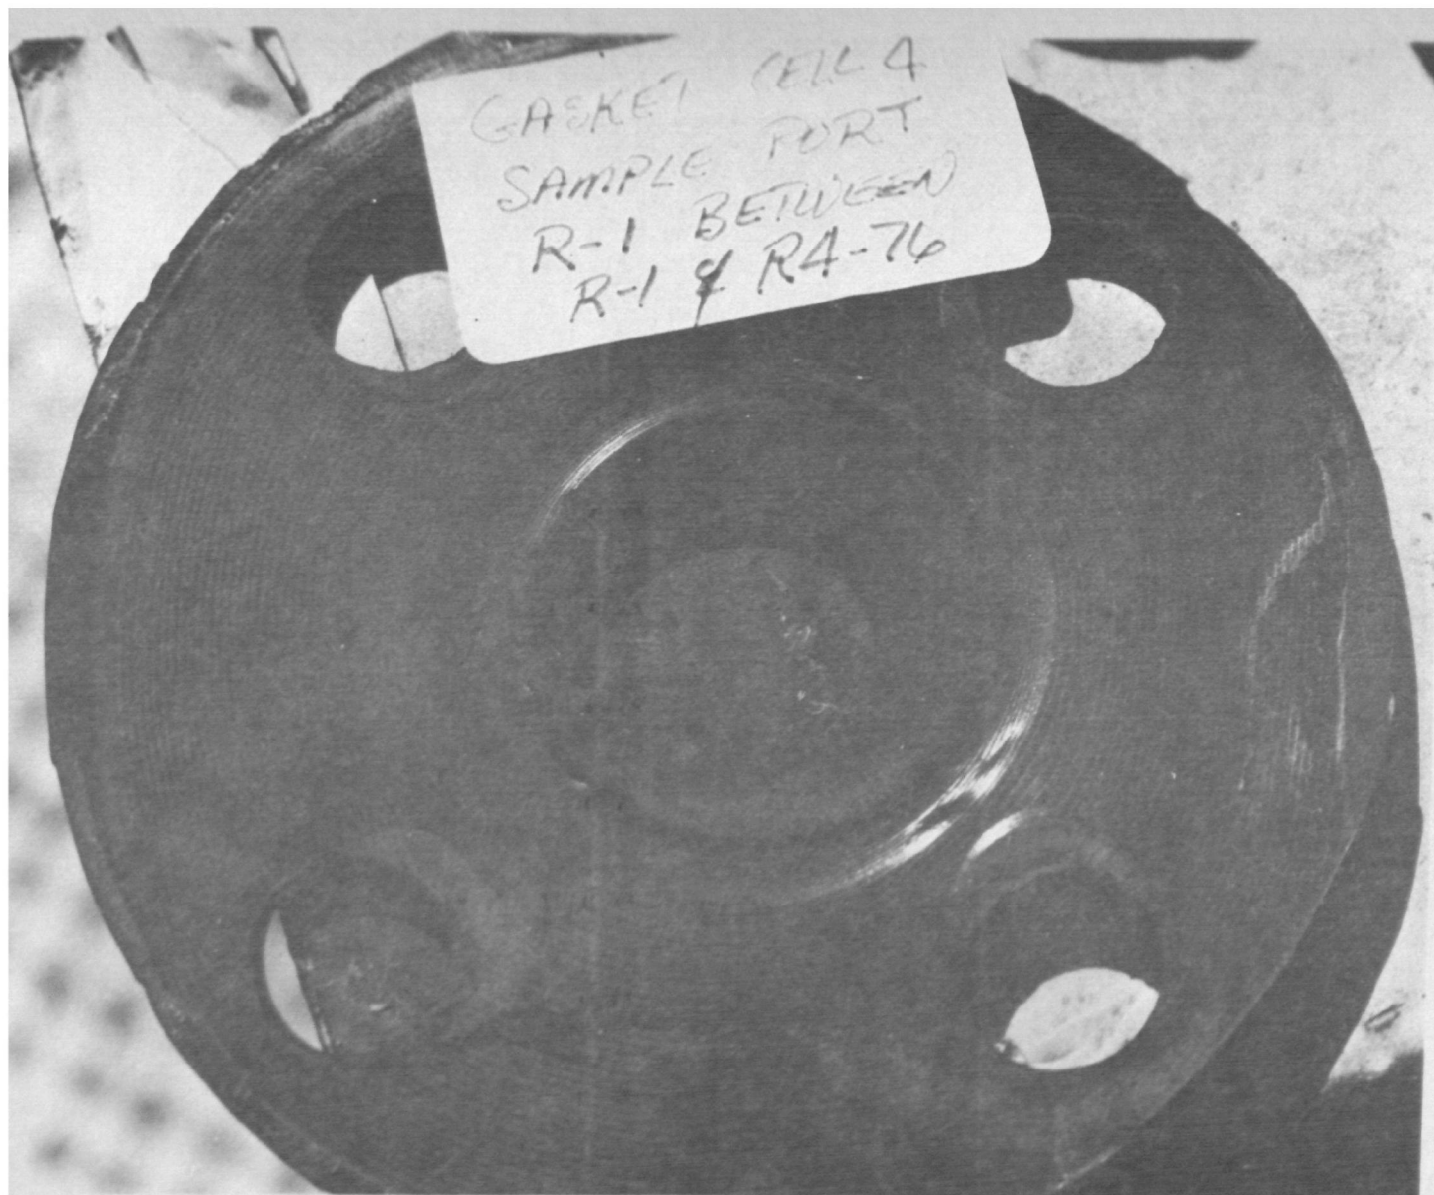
Flange Gasket from Reactor R-1 Cell 4 Sample Valve R4-76.
